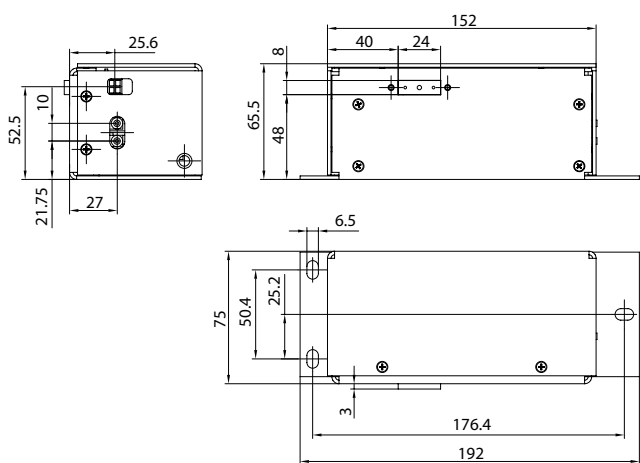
Outline drawing of encased version DPB-10 and DPB-5 drivers with PS-5 power supply
